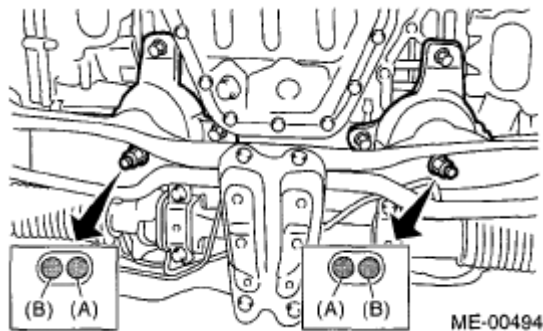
Locating Transmission Lower Side Bolts And Nuts
